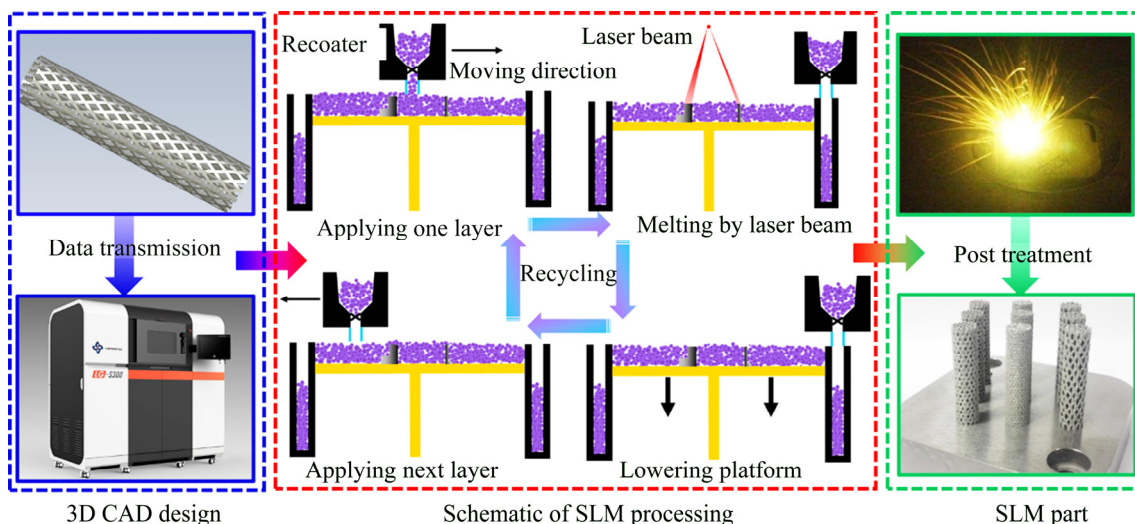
Processing steps involved in SLM production from 3D design to final parts
